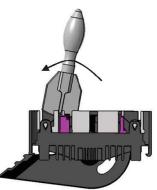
38-way connector, operating tool inserted into the gap Abb. 19: Kabelbaumstecker 38 polig; Betätigungswerkzeug in den Spalt schwenkend schieben
